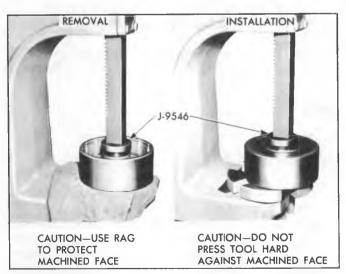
PG-Removing and Installing Clutch Drum Bushing
